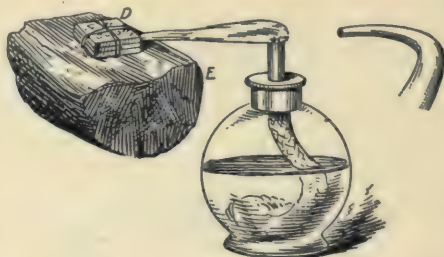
Blow Pipe Fitted Joint Soldering.
